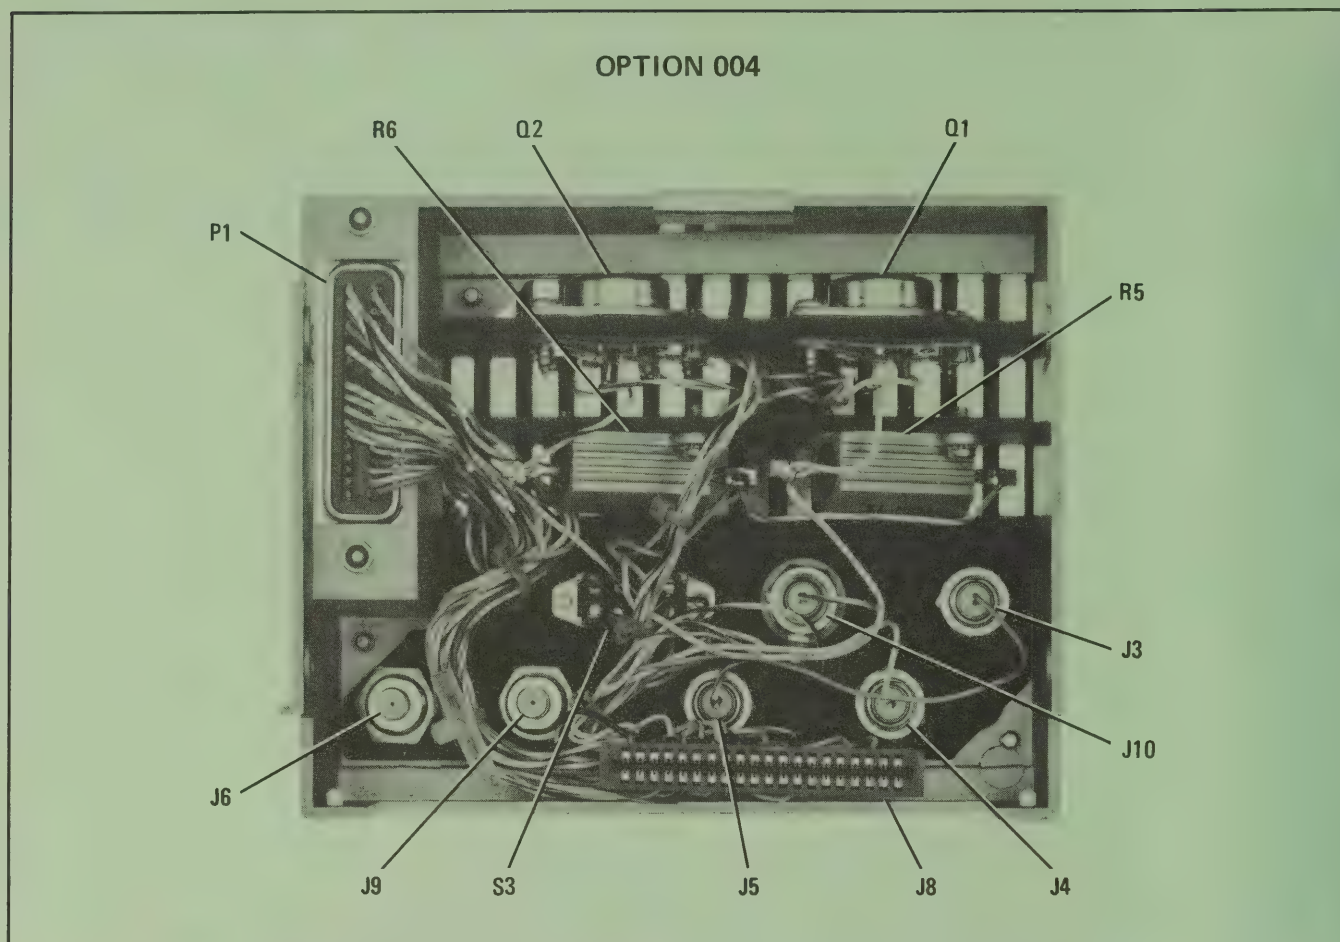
Rear Panel Component Location Opt. 004 (CHANGE F)
